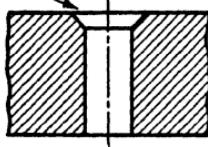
For tapped holes, countersink prevents cracking.
